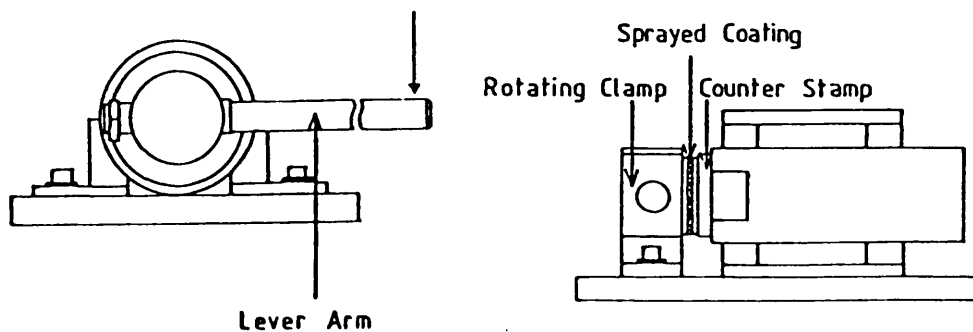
Torsion testing fixture to determine shearing strength of sprayed coatings. (After Boehne Ref. 58)
